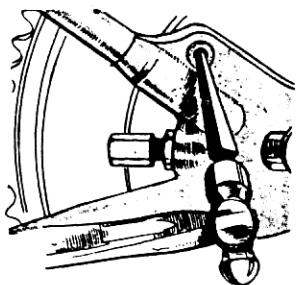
A stud that has broken off flush can often be removed by drilling a hole in the stud, hammering in a square-section, tapered drift, and unscrewing
